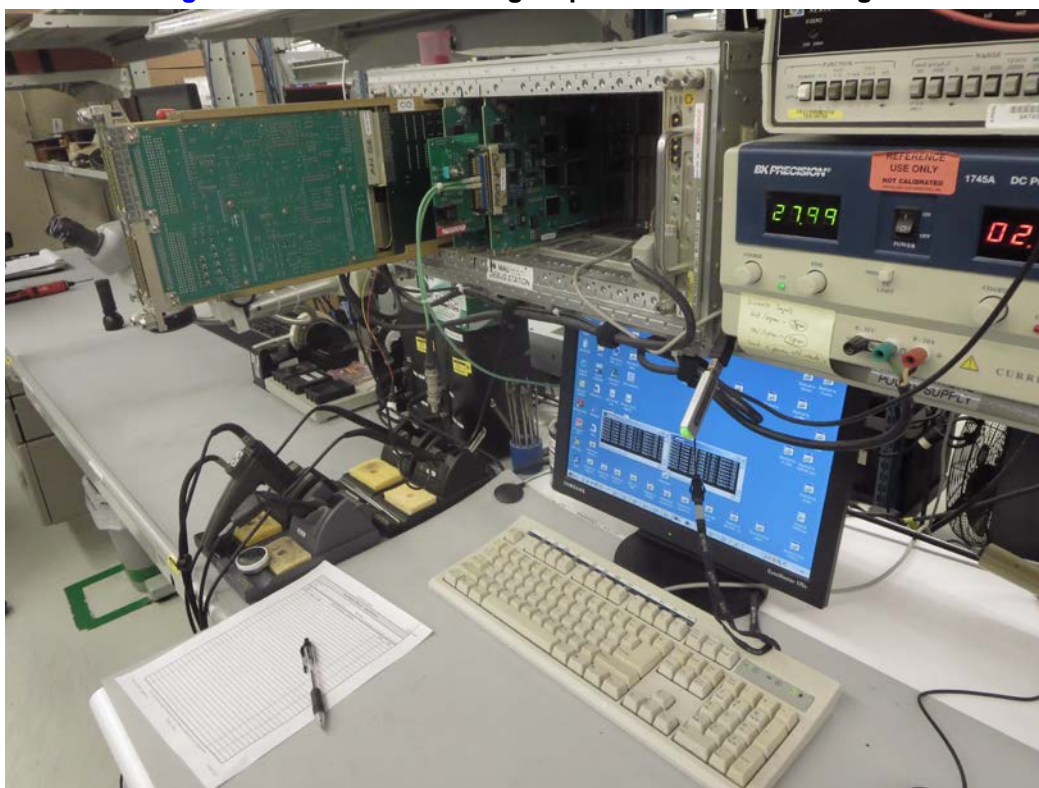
CSIO Module Installed Into Test Fixture for Downloading
